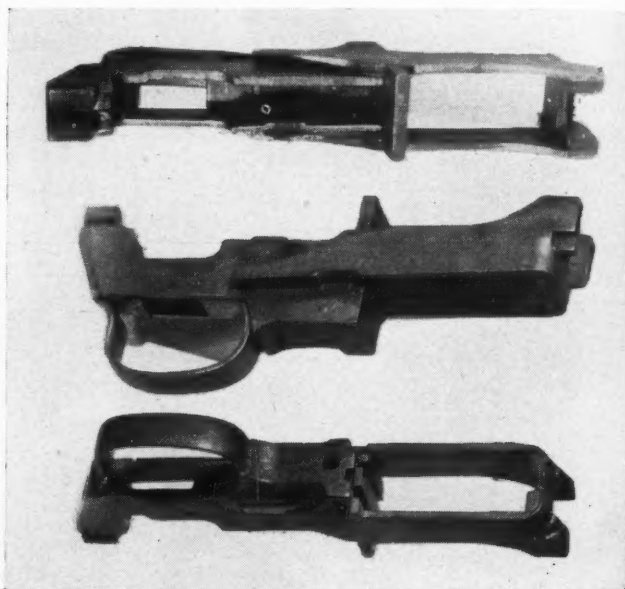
Trigger housing for the .30-caliber carbine is a composite stamping assembled from 14 separate parts welded and copper-brazed
